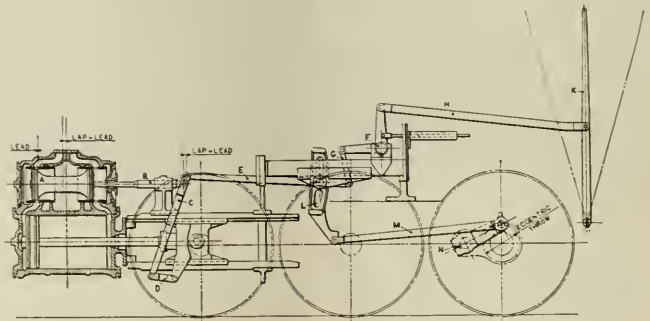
WALSCHAERTS VALVE GEAR ADAPTED FOR INSIDE ADMISSION PISTON VALVES.
